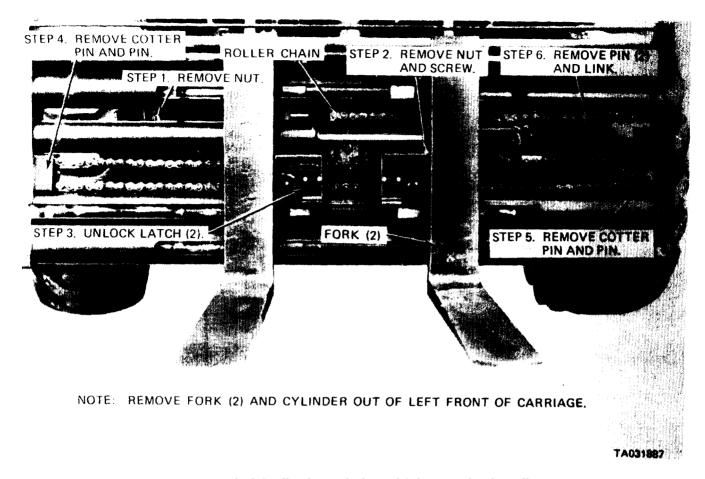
Side shift roller chain, cylinder, and forks, removal and installation.
